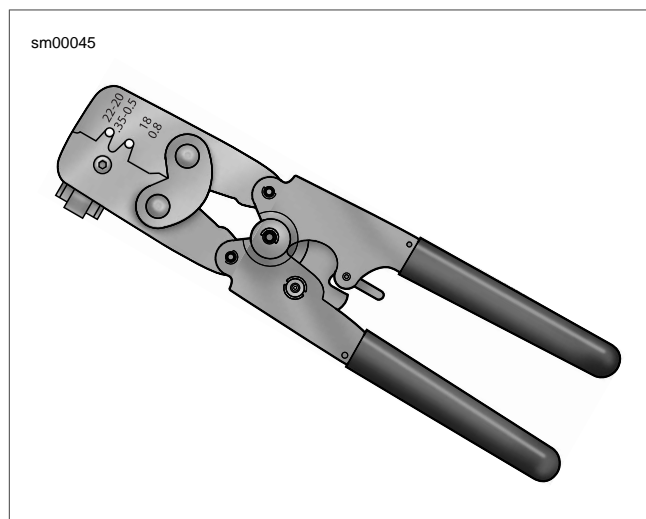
Packard Micro 64 Terminal Crimper (HD-45929)
